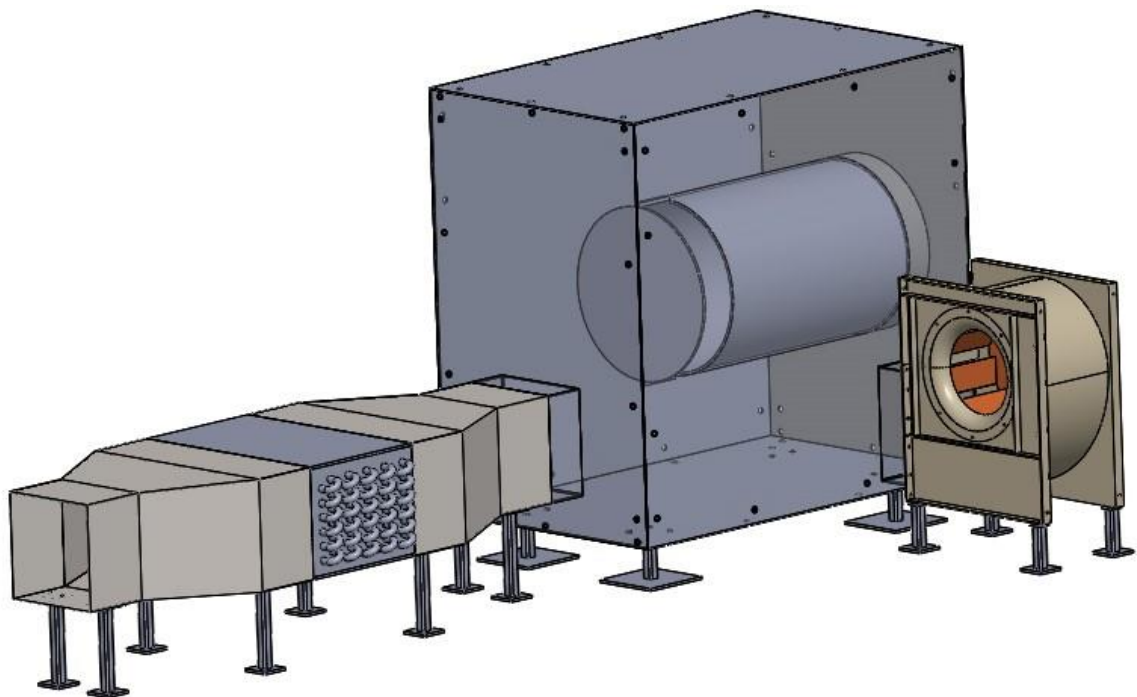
Isometric view of the assembly - Internal detail of the combustion and mixing/dilution chamber .
